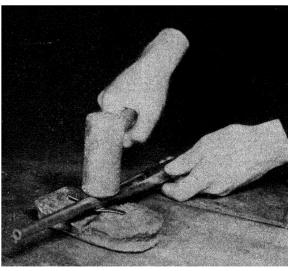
Use a mallet, ring mandrel, and lead or wood block to shape a sheetsilver ring blank.
